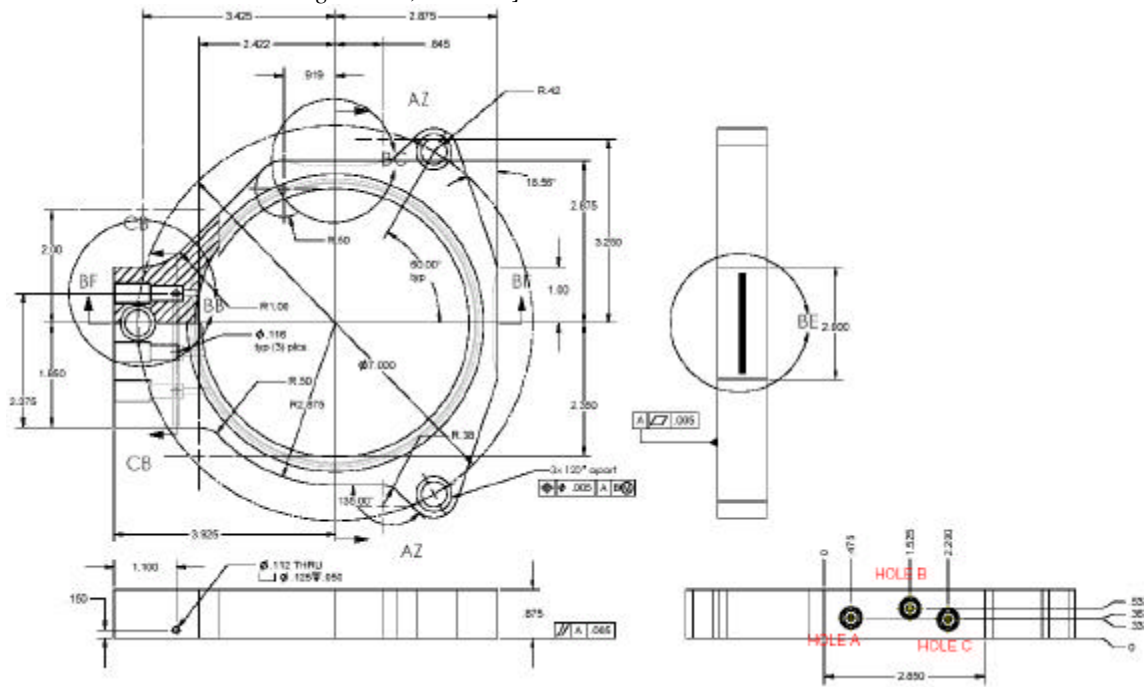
Actuation Plate Hole Dimensions (D020285-A with Revision B markups indicated)
